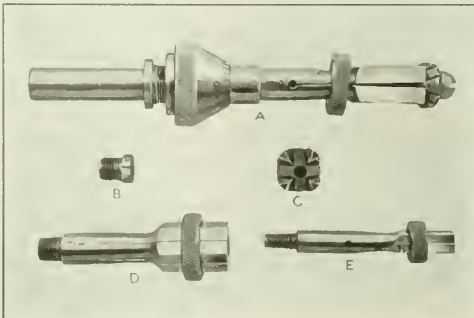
Adjustable Broach made by the Edward Hollander Tool Co.
